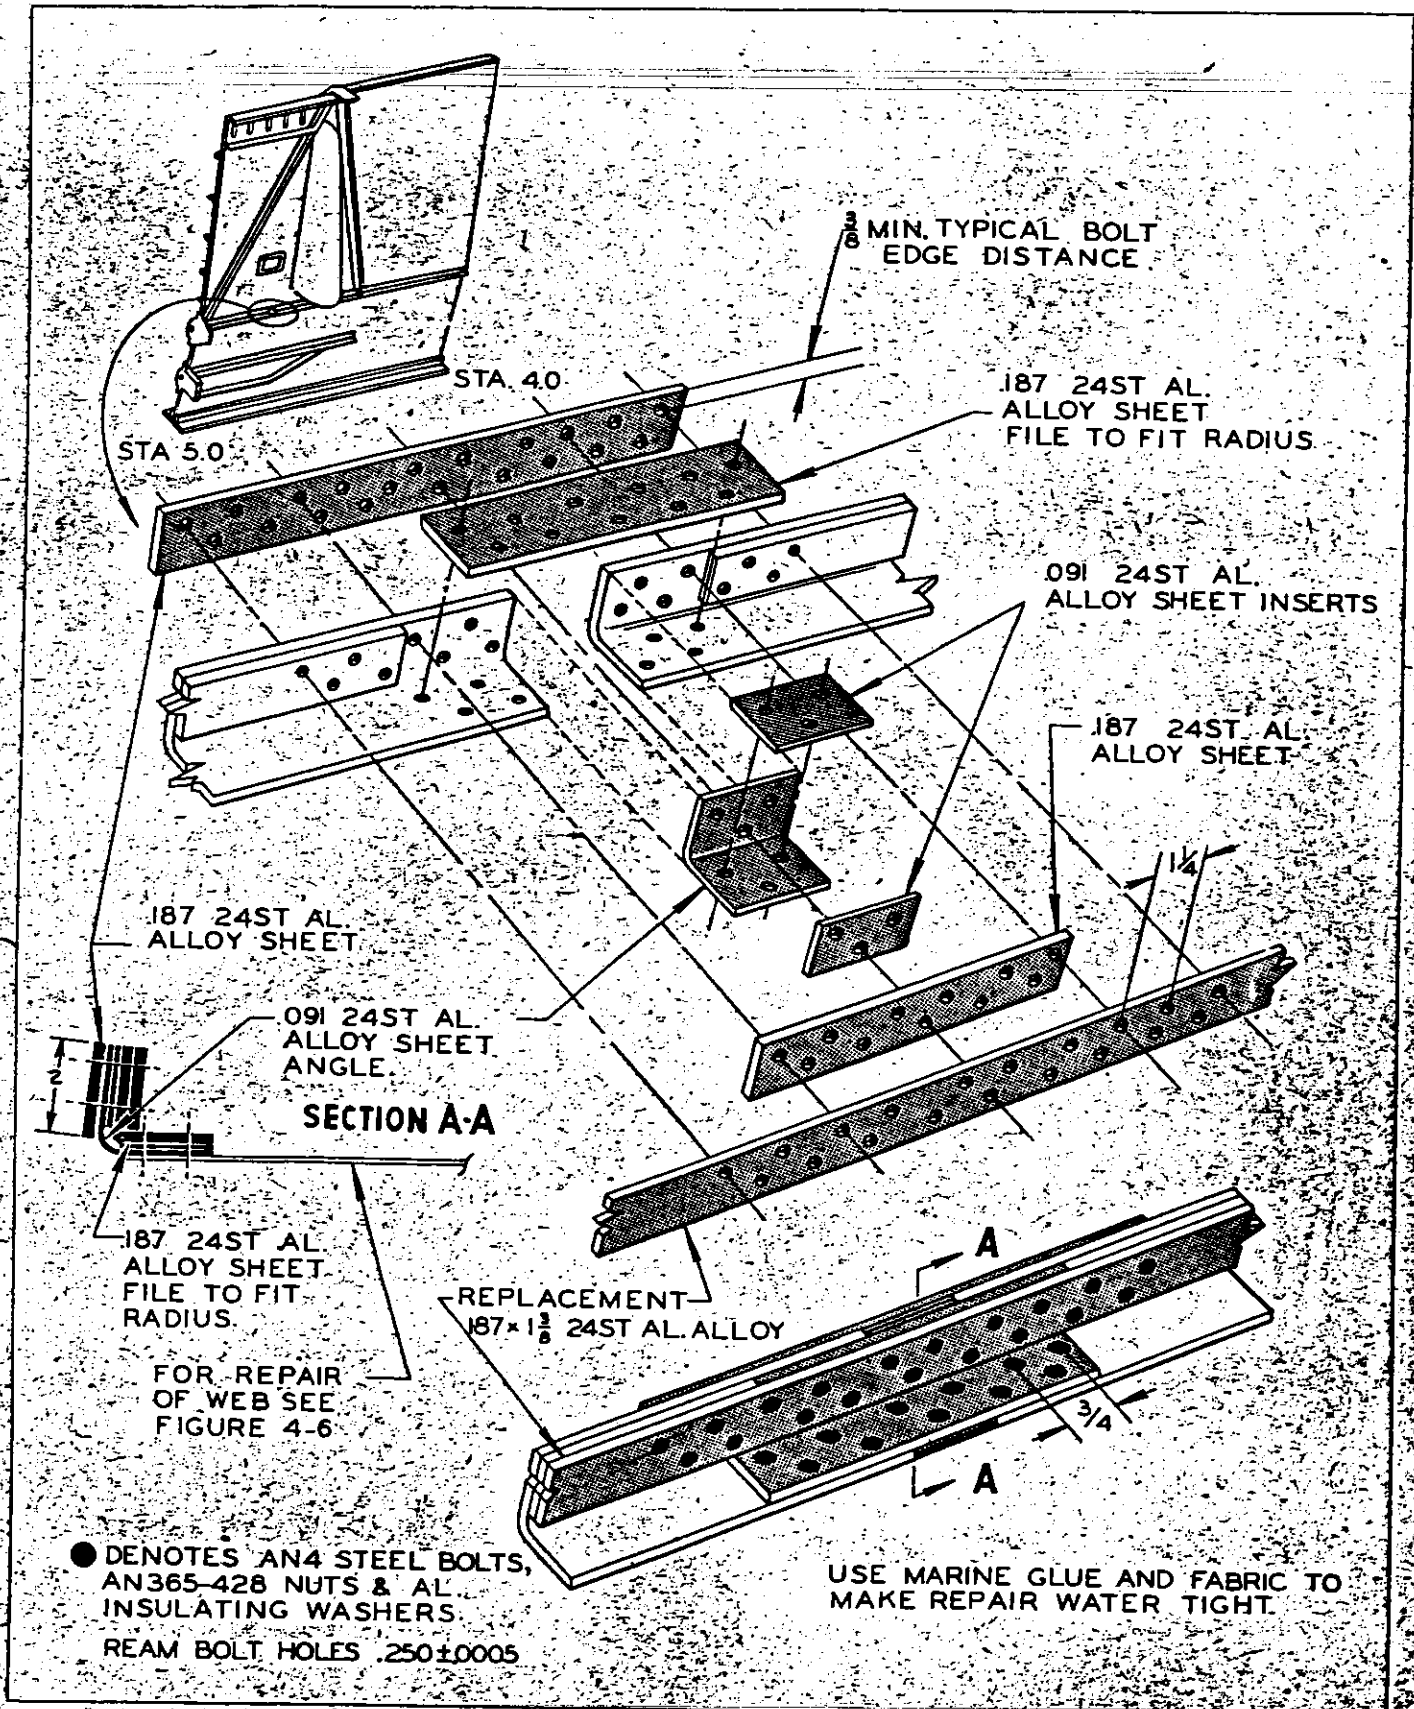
(Sheet 2 of 5 Sheets)—Main Wheel Well Enclosure Repair
